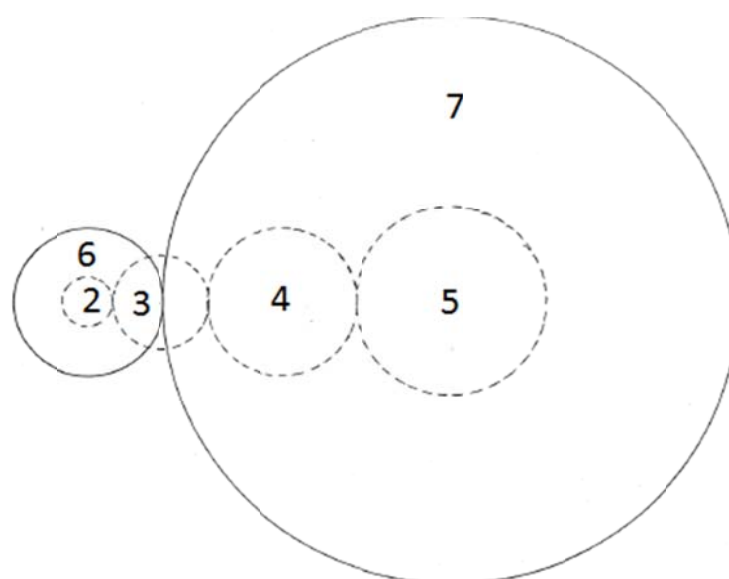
Gears 6 and 7 needed if Gear is not used
